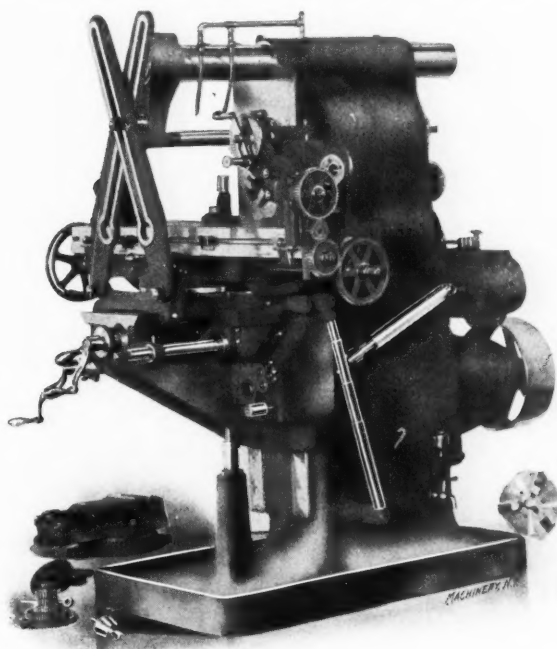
Right-hand Side of Universal Miller, showing Oiling Arrangement and Spiral Head.
